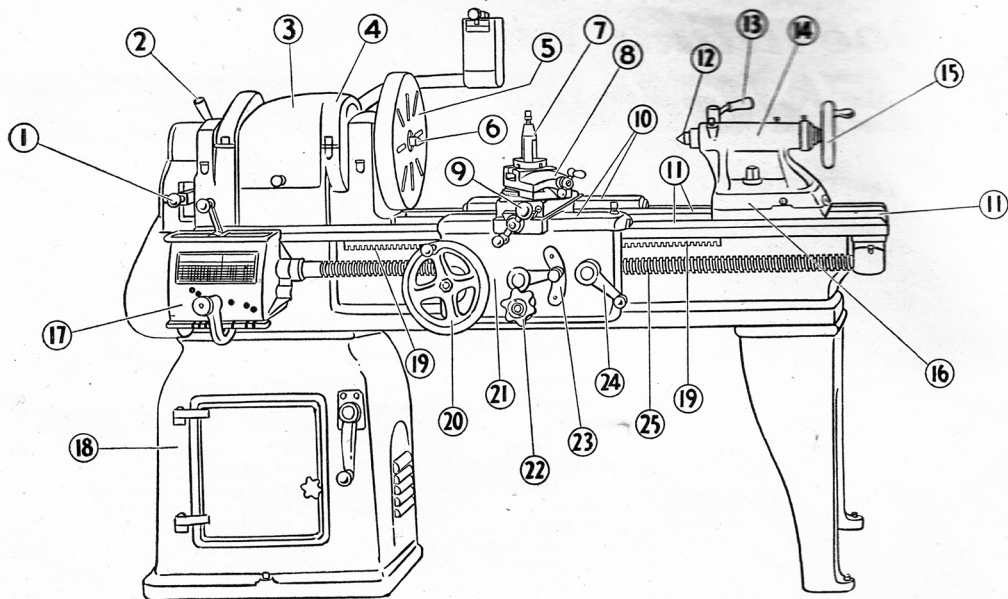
A FLOOR TYPE BACK-GEARED ENGINE LATHE
